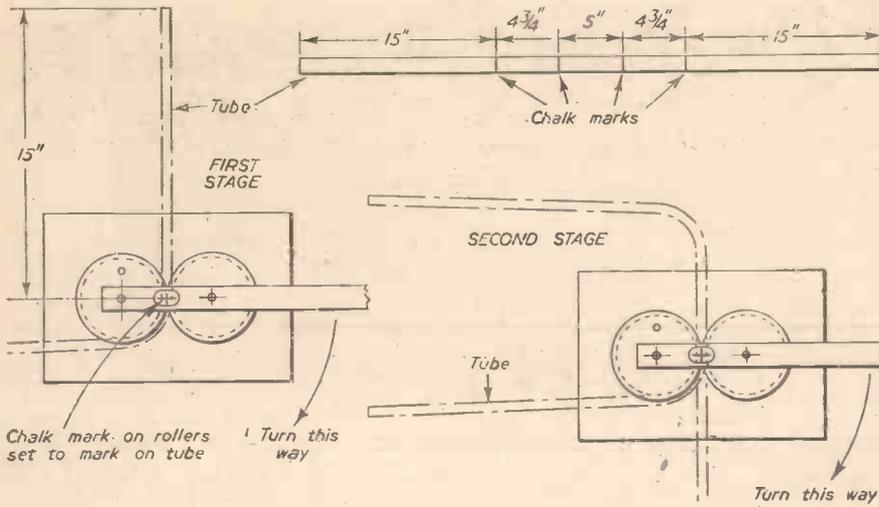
Brief sketches showing the tube in position ready for bending.
